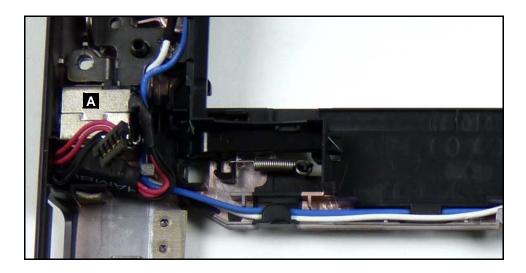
DC-IN Cable and Jack on Lower Cover
